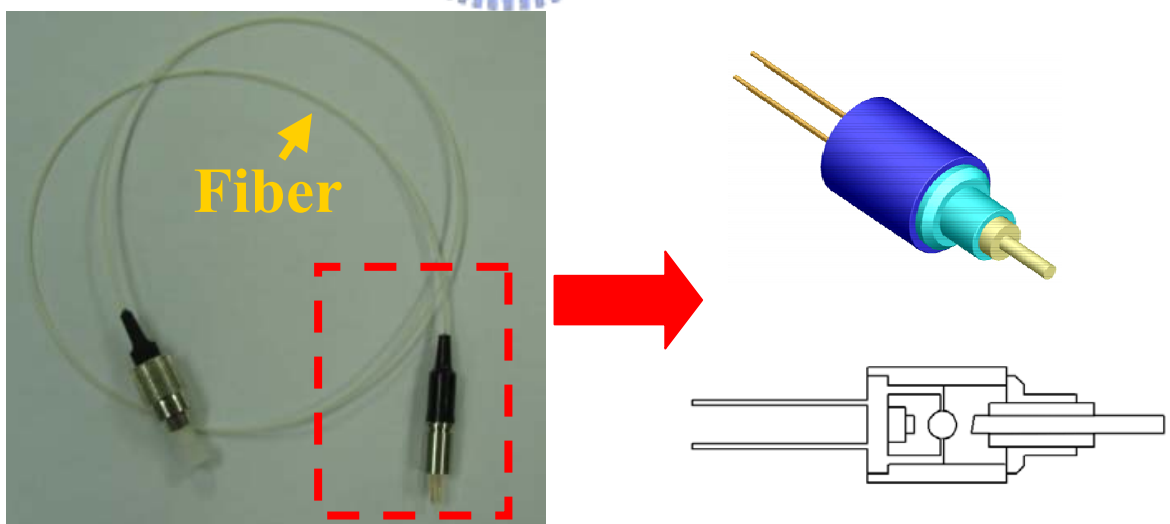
The QD VCSEL TO-Can package and the single-mode fiber are assembled by laser welding technique.
